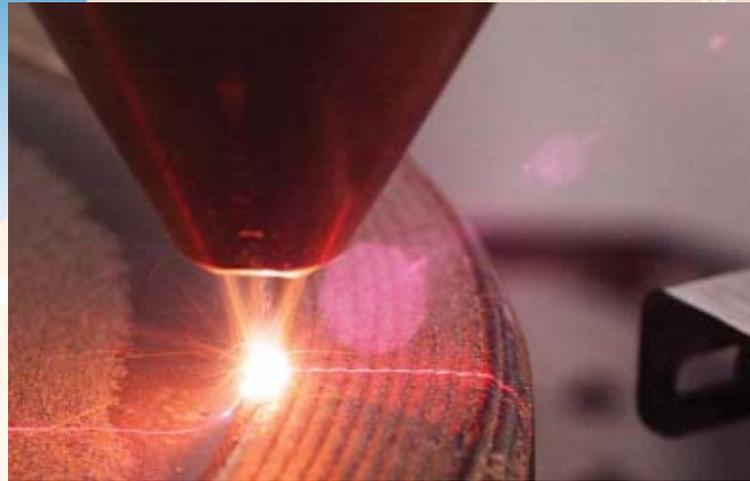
Example of surface cladding of component face. Courtesy: Joining Technologies
